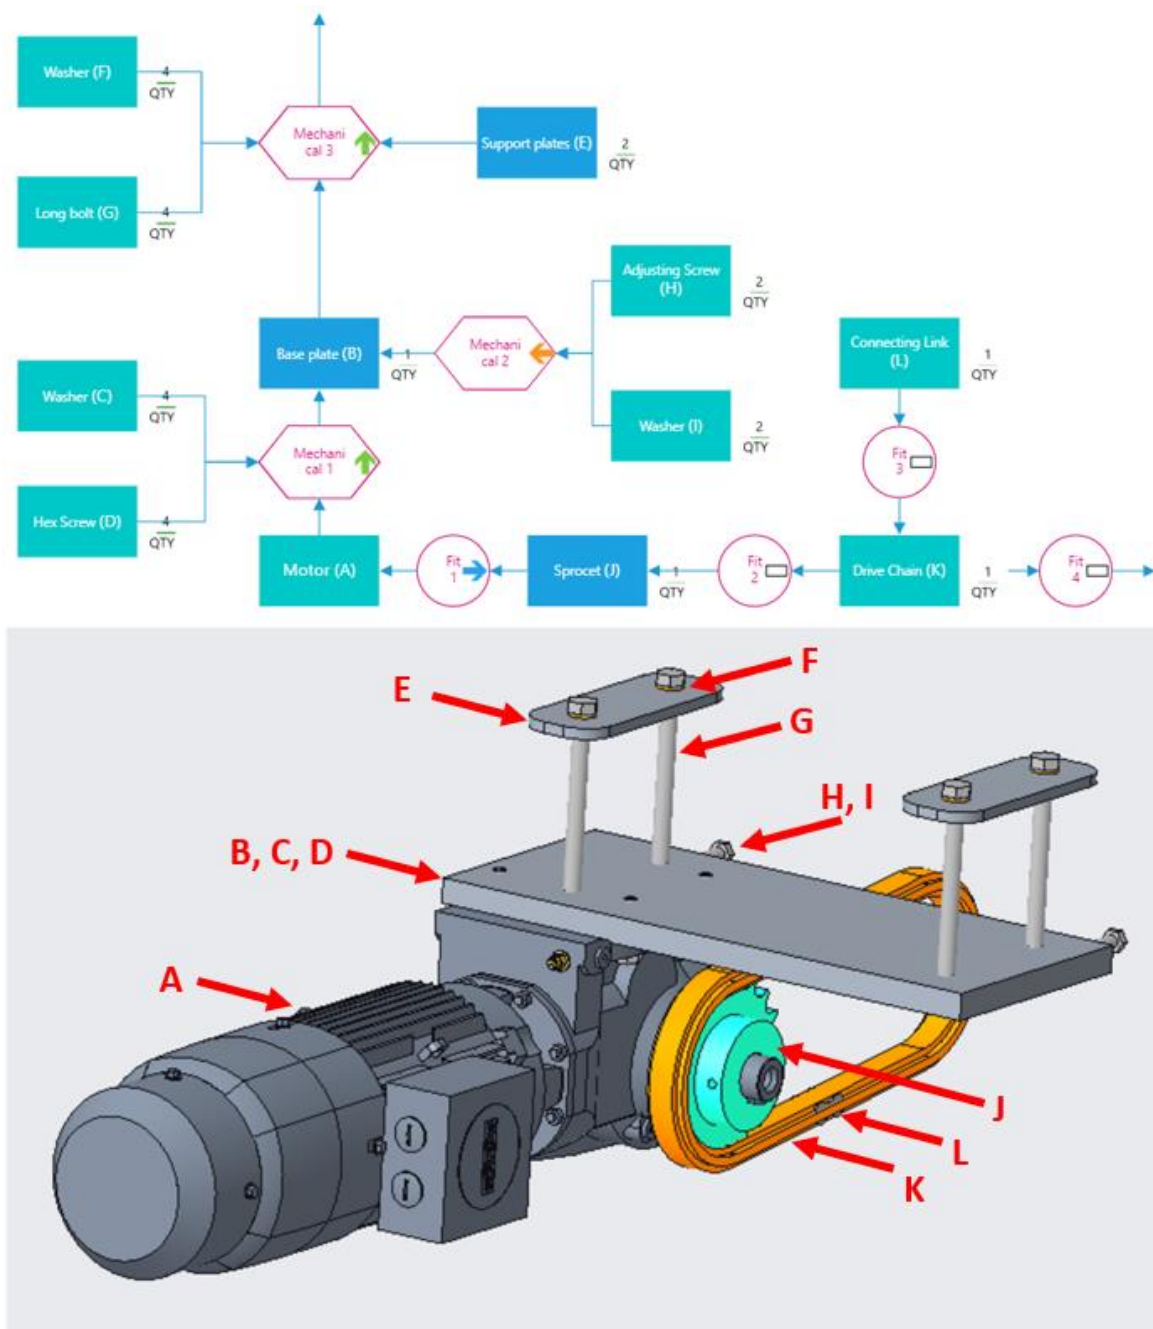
A motor assembly presented on the diagramming software containing mechanical joints and fit joints. The assembly assembles forward to other assemblies from Drive Chain (K) with Fit 4 and from Base plate (B) with Mechanical 3. The Base plate can also be seen as the base part of this sub-assembly, since other parts joins to it, and sub-assembly itself is joined to the main assembly through it.
